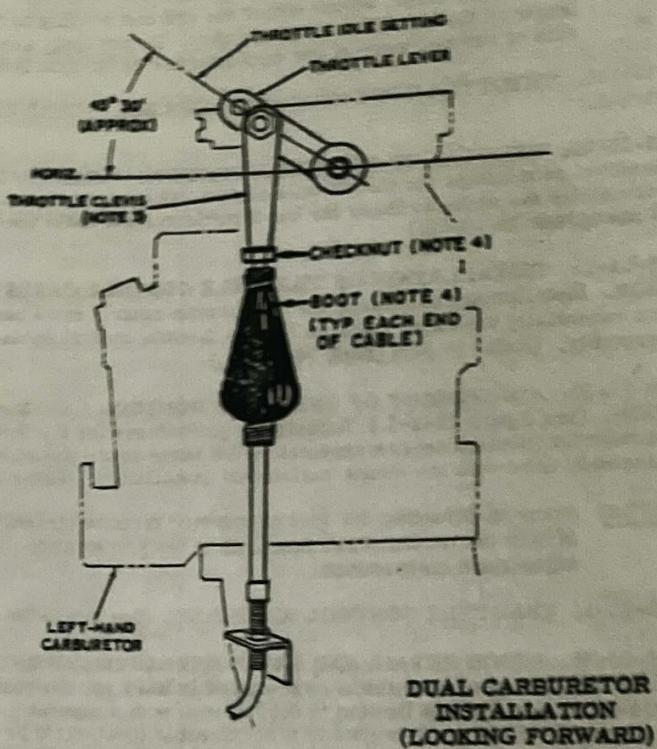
Adjustment, Throttle Control Cable Assembly
